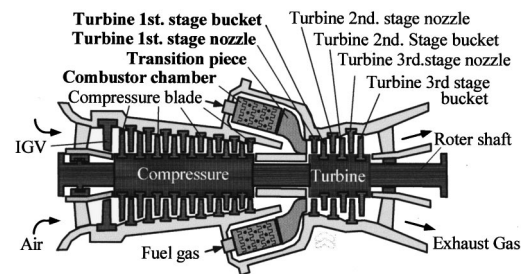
Gas turbine main hot gas path parts (bold letters)
